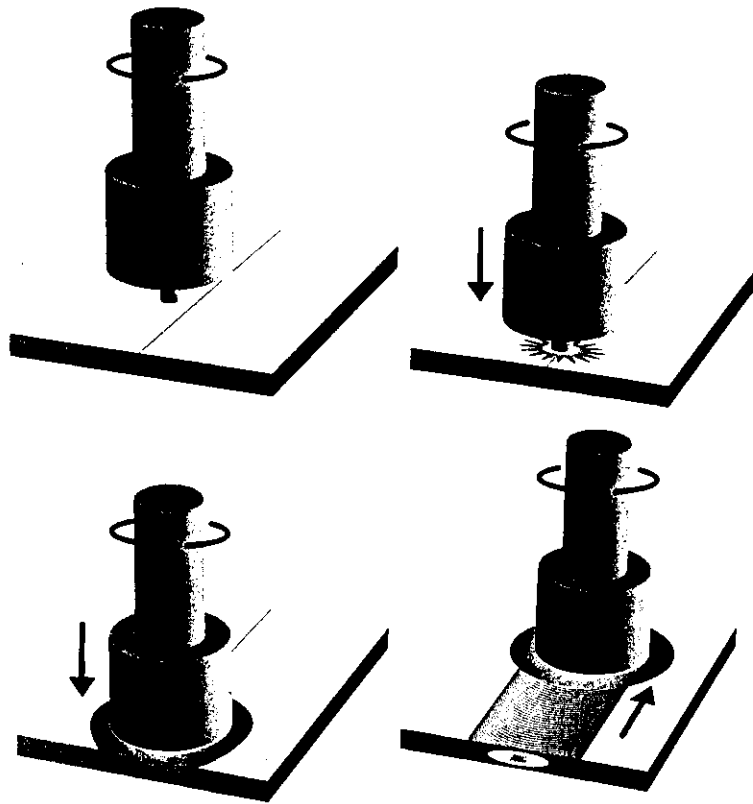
Schematic illustration of Friction Stir Welding process
